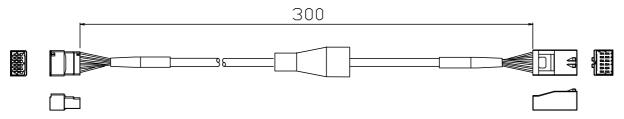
Outline drawing of the hand cable (4F-MEHCBL-01)
